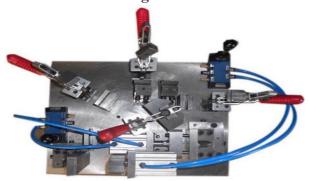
Hydraulic and Pneumatic Welding Fixtures (Google, n.d.)
